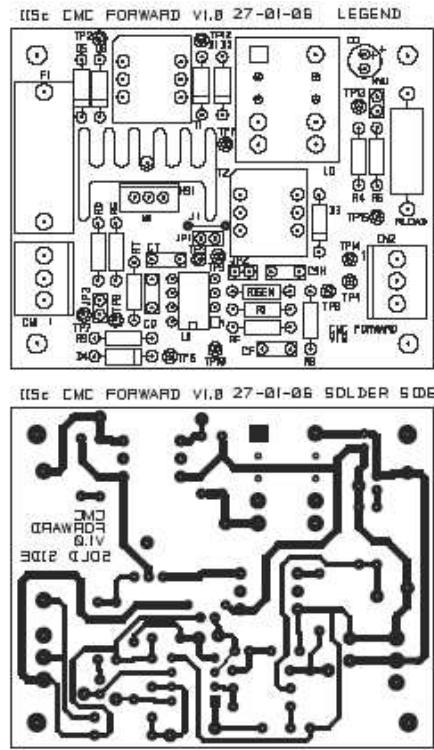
Solder and Component Side of CMC-Forward Converter
